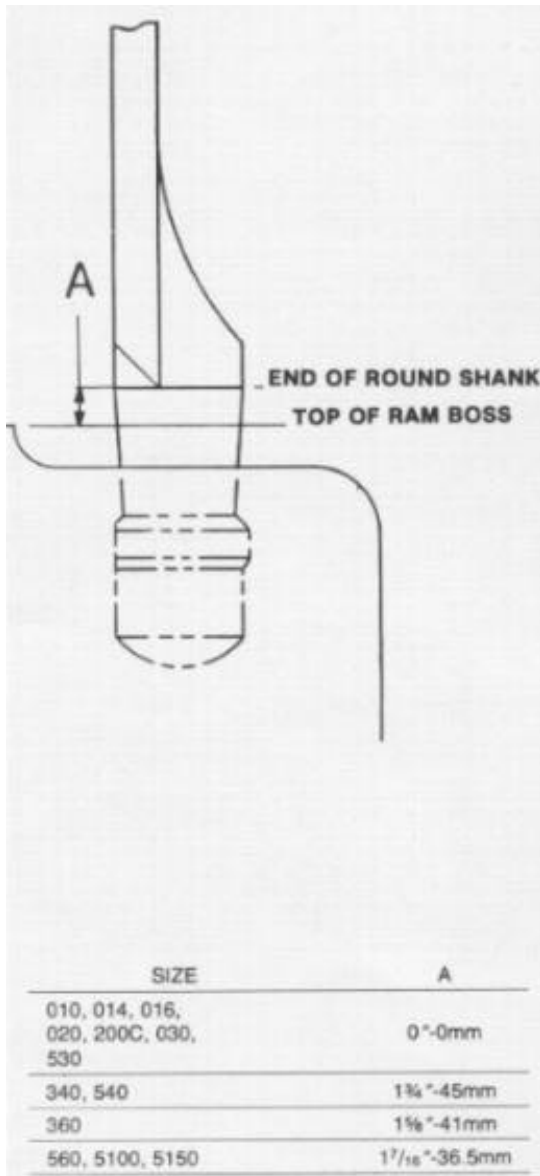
Slide Bar Adjustment Dimensions
